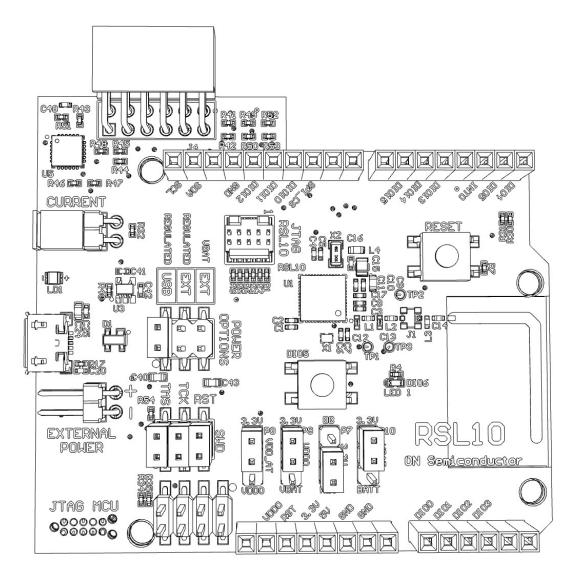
Three-Dimensional Line Drawing of the QFN Board (Top View)
